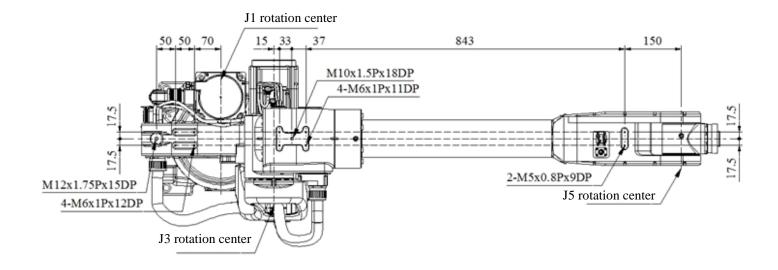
(e) RA610-1869-GB Mounting surfaces on the robot RT610-1869-GB Mounting surfaces on the robot
